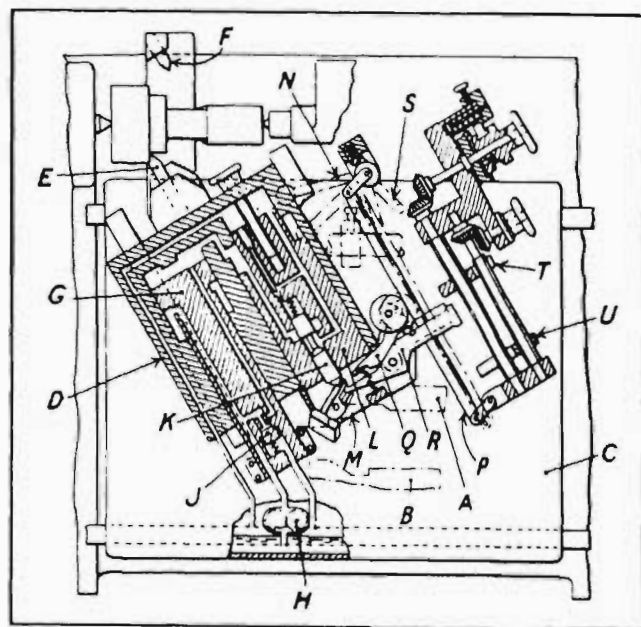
Sectional view of a hydraulically operated cross-slide for a copying lathe, employing two templates, A and B, of the part to be turned.
